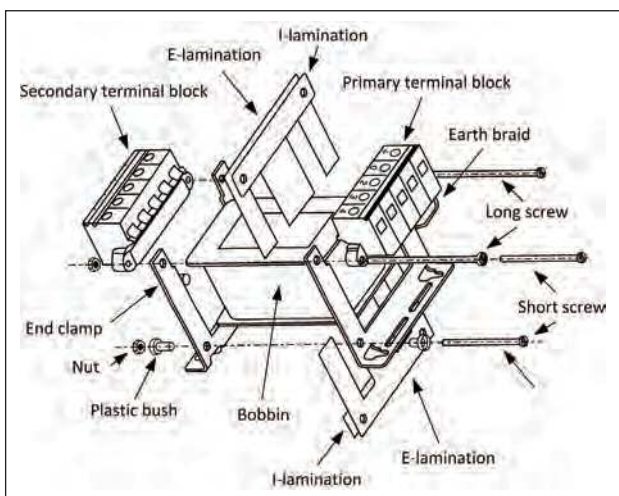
Exploded view of a conventional steel-cored power transformer.
